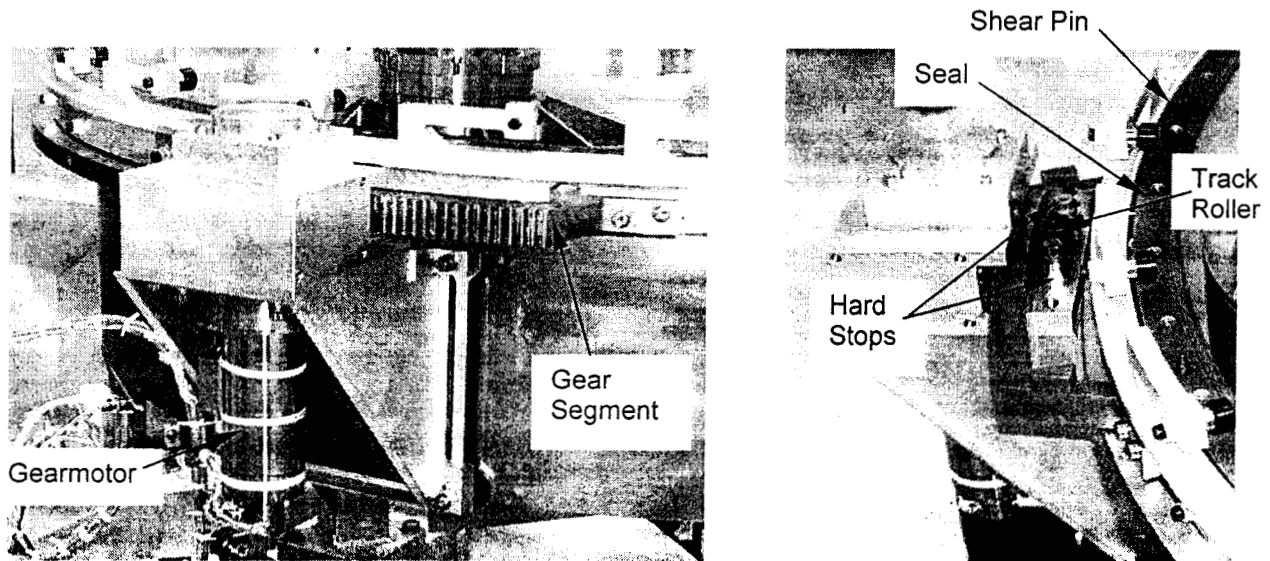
and 8b. The Lock Ring Drive Mechanism uses a pinion and sector geartrain to move the Lock Ring to its locked and unlocked positions.
